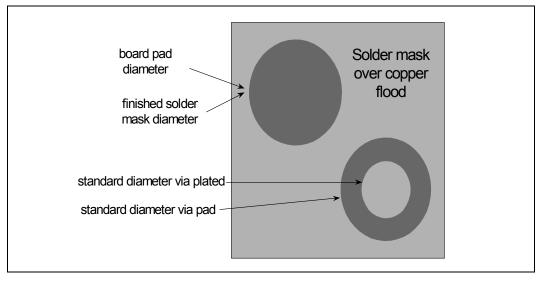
Via-Pad Layout Solder Mask-Defined Pads
